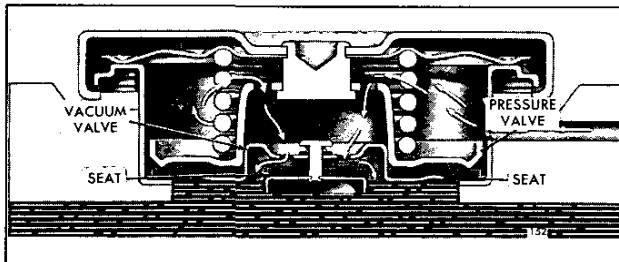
Pressure Control Cap (Vacuum Valve Open)
